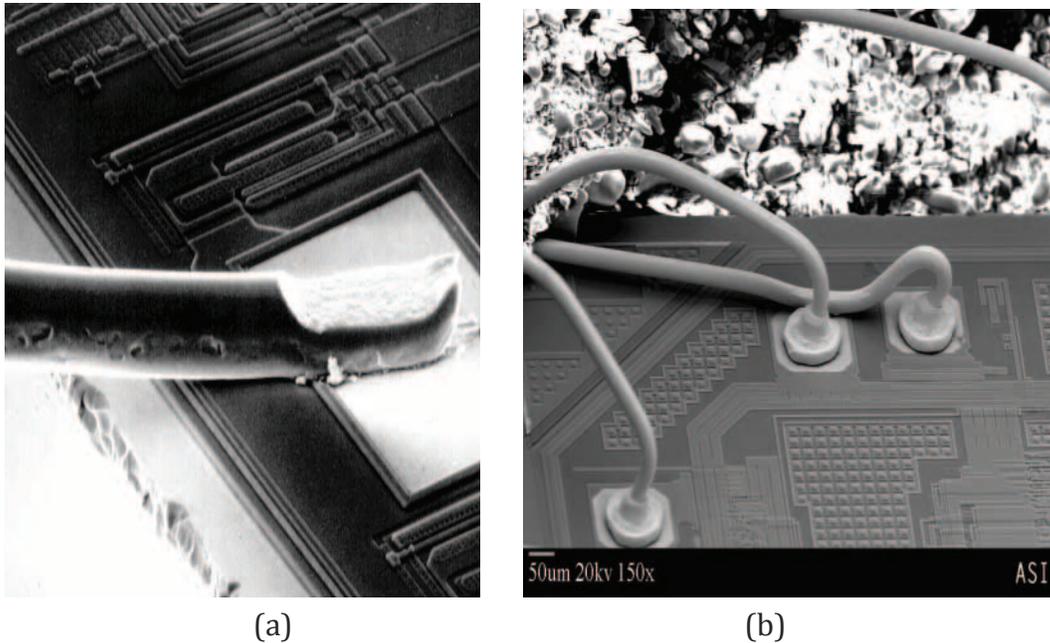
(a) Wire bond to chip edge clearance and (b) Assembly-related bond wire short caused by pre-molding mechanical damage.
